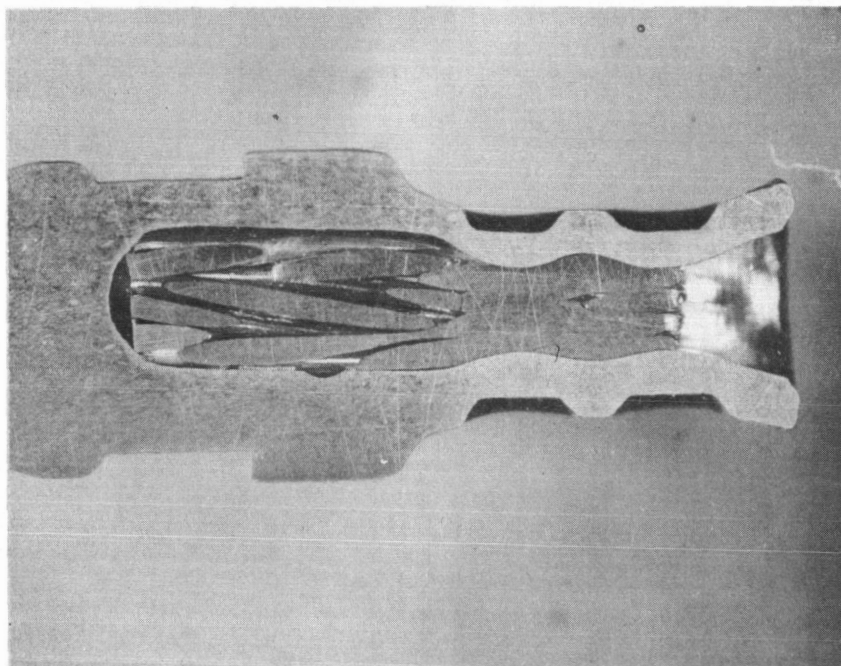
CESO-16-DO43-16 Section View of Crimped Contact After Tensile Test
